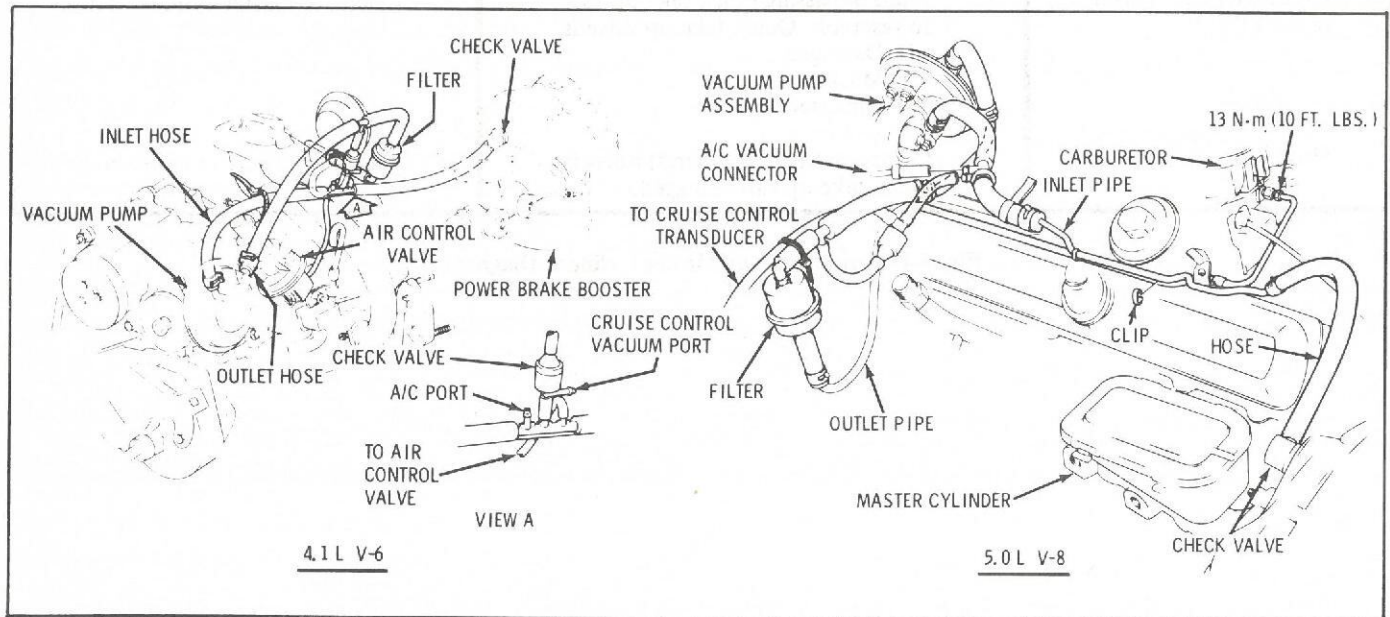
Power Brake Vacuum Hose (Toronado) - Replaces Figure 5-9
